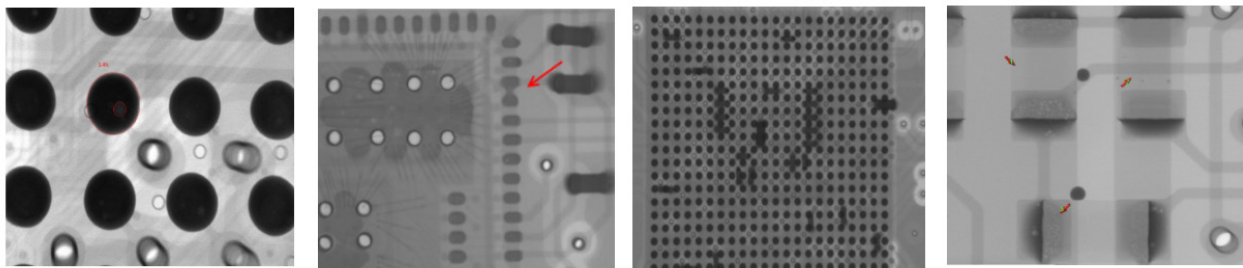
Examples of concealed PCB defects [2]
